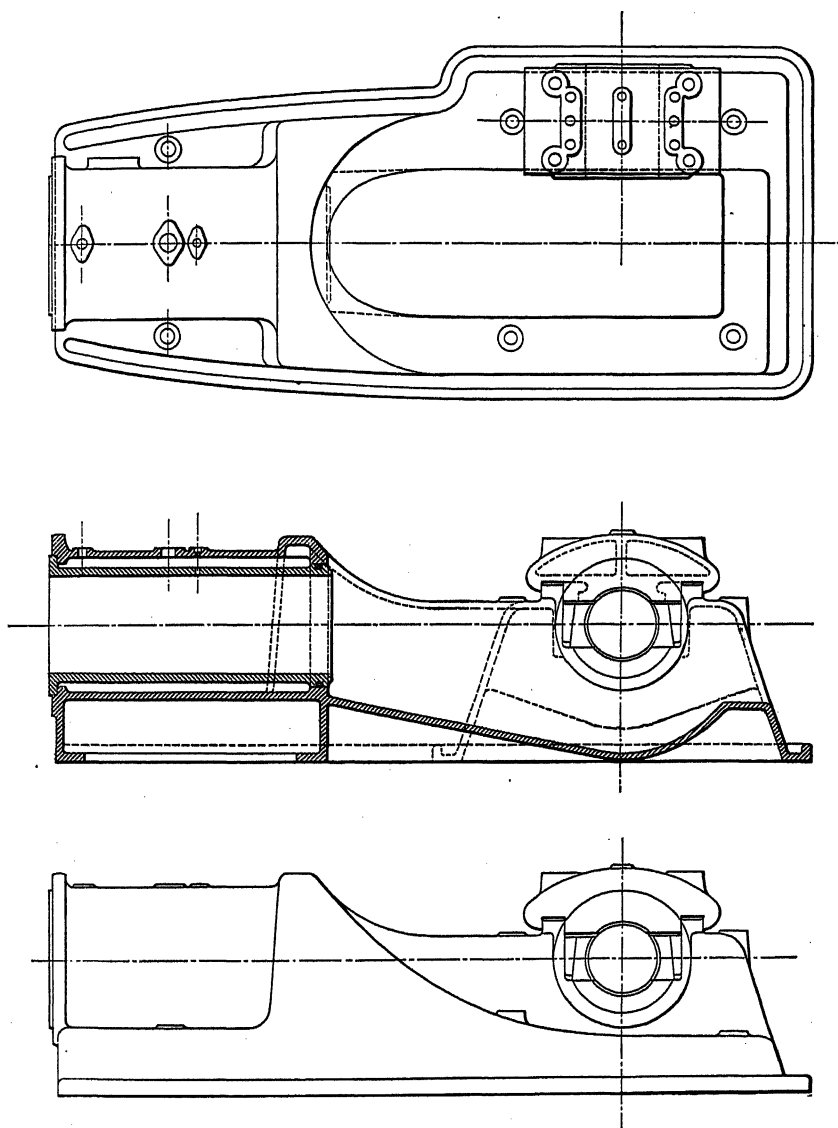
Engine-Bed for Side-Crank Shaft.
